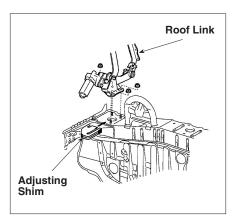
Shims can be added or subtracted to help raise or lower the roof line.
